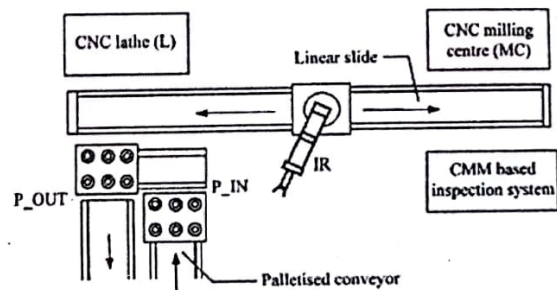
Simulation of CMM integration to flexible machining line †102‡
